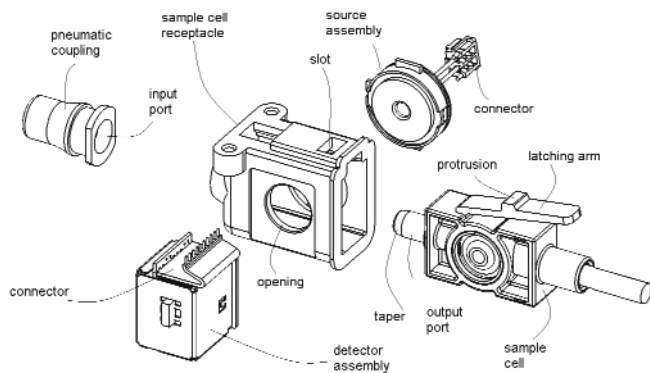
Exploded view of the sample cell receptacle assembly from the detector assembly side.
